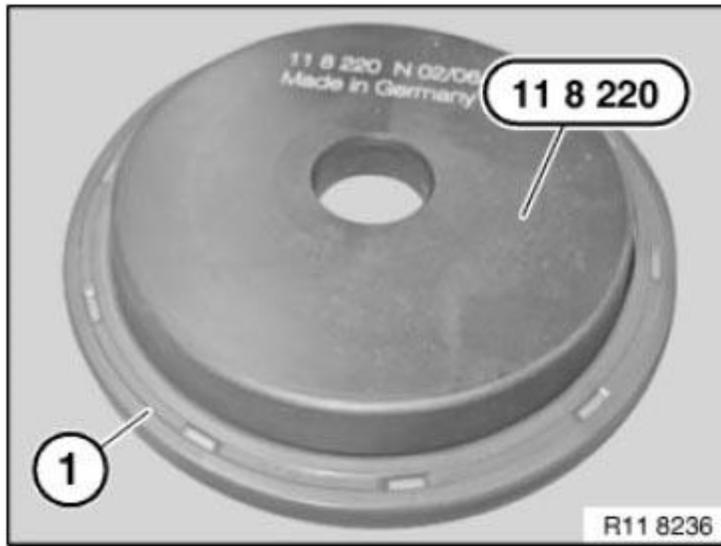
Identifying Radial Shaft Seal On Special Tool 11 8 220
